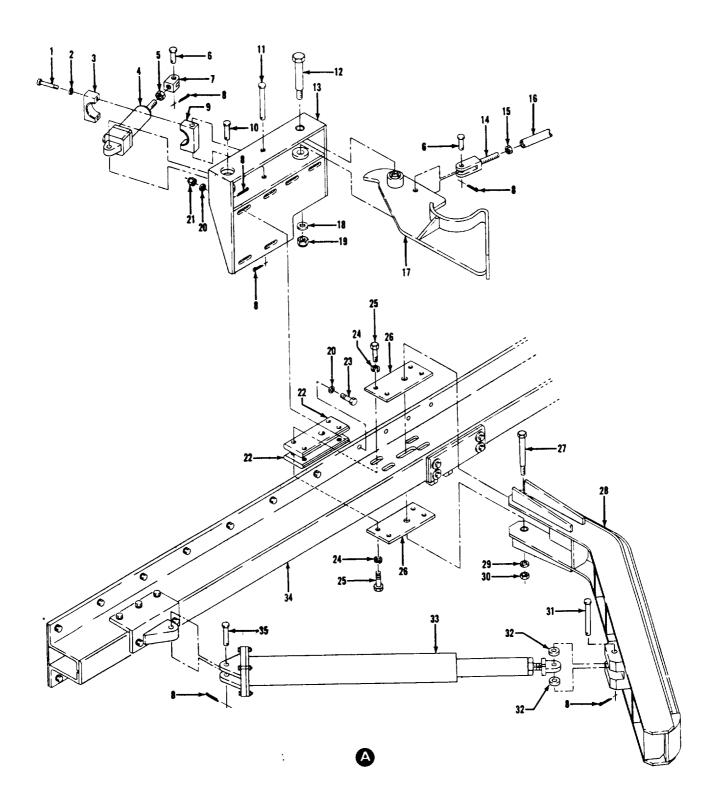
LES Coupler Assembly (Sheet 2 of 9)
